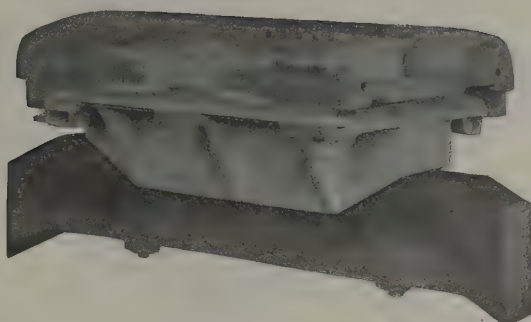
Creco Covered Roller Side Bearing Applied to Bearing Bridge of Six-Wheel Truck.
